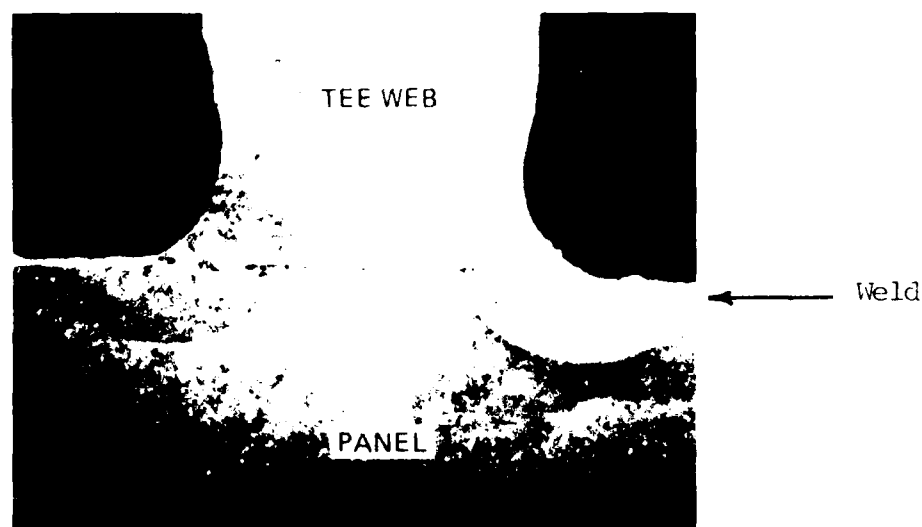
FILLET WELD TECHNIQUE 10X
